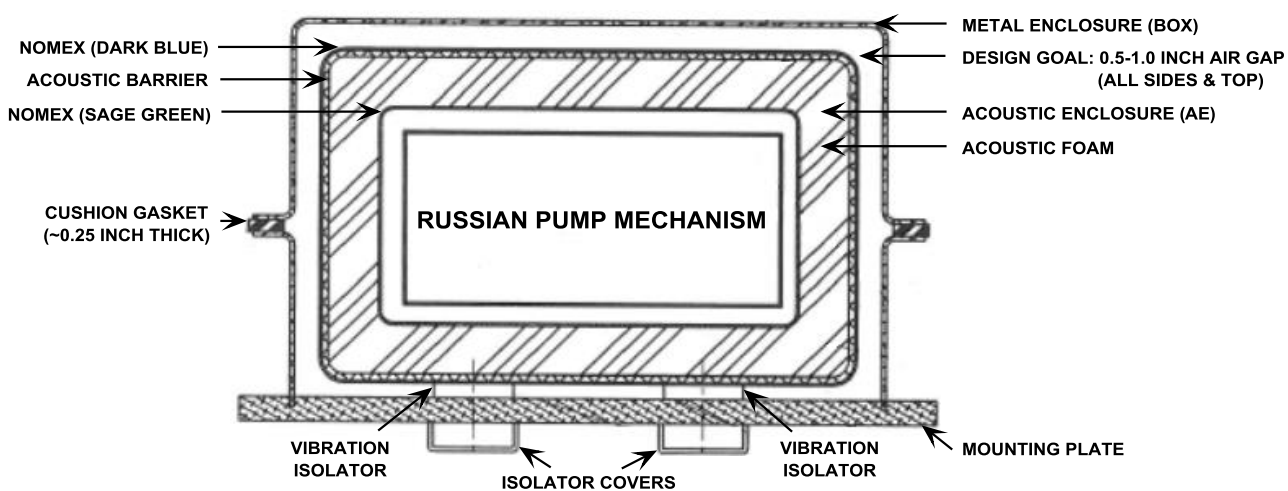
Layout of the Airlock Depressurization Pump Quieting Kit assembly.
